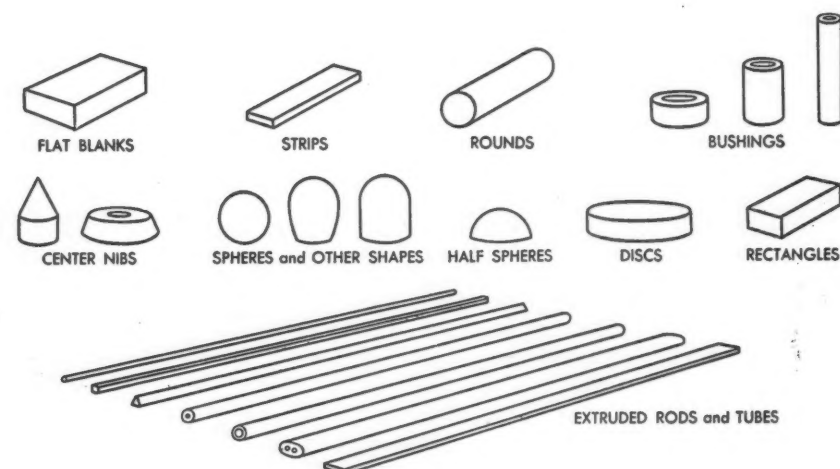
Typical simple shapes for carbide parts made by pill pressing and extrusion.
